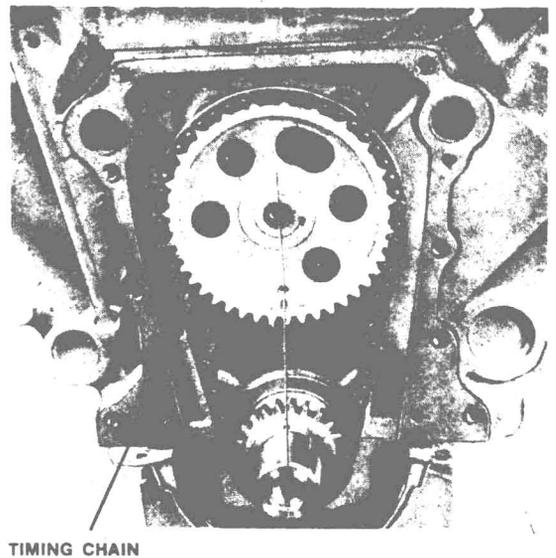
Crankshaft and camshaft sprockets with chain drive for a V-8 engine. (Chrysler Corporation)
